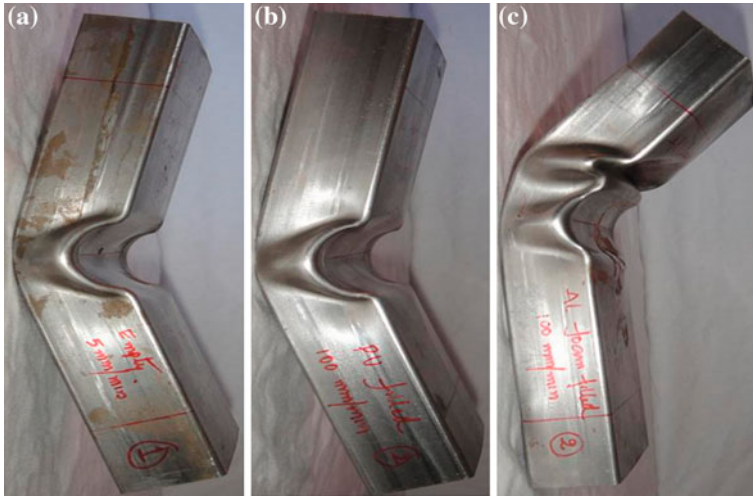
Deformed shapes of 3-point bend specimens. a Empty extrusion, b PU foam filled extrusion, c Al-metal foam extrusion
